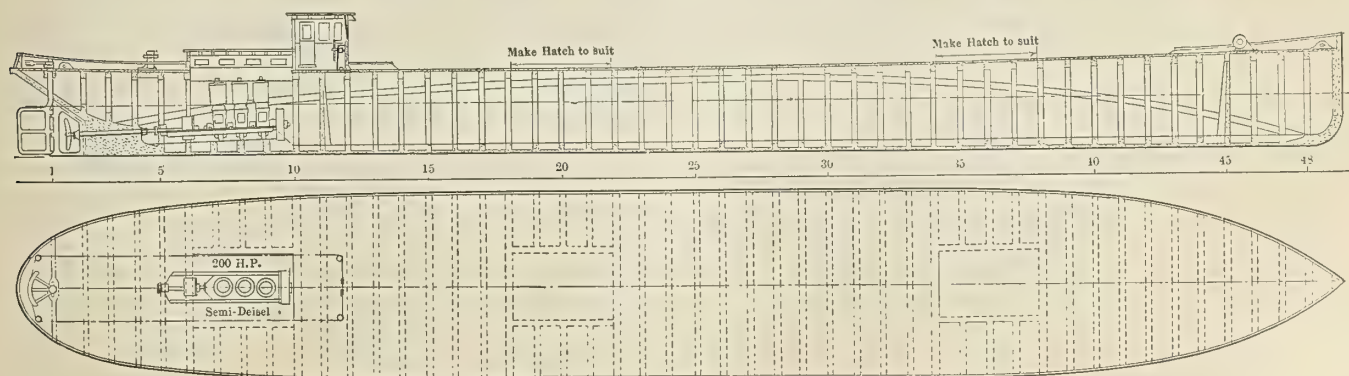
Reinforced Concrete Motor Freighter. Length over all, 150 Feet; Beam extreme, 22 Feet; Beam molded, 21 Feet; Load draft, 6 Feet
